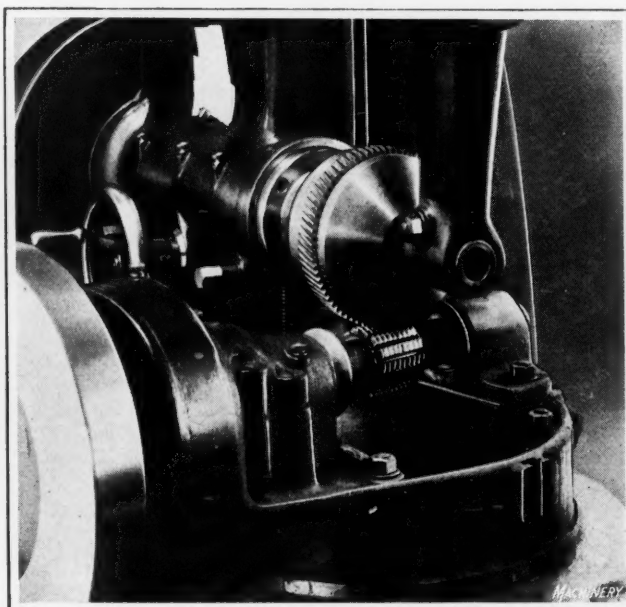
Cutting Timing Gears on a Horizontal Hobbing Machine
